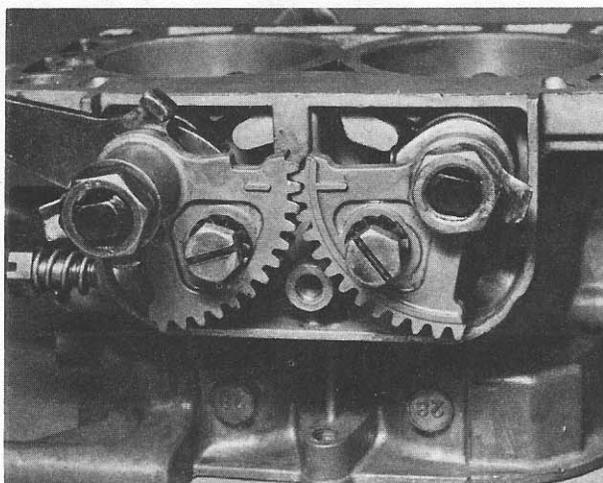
Location of the accelerator pump ball valve (Sec 7)
